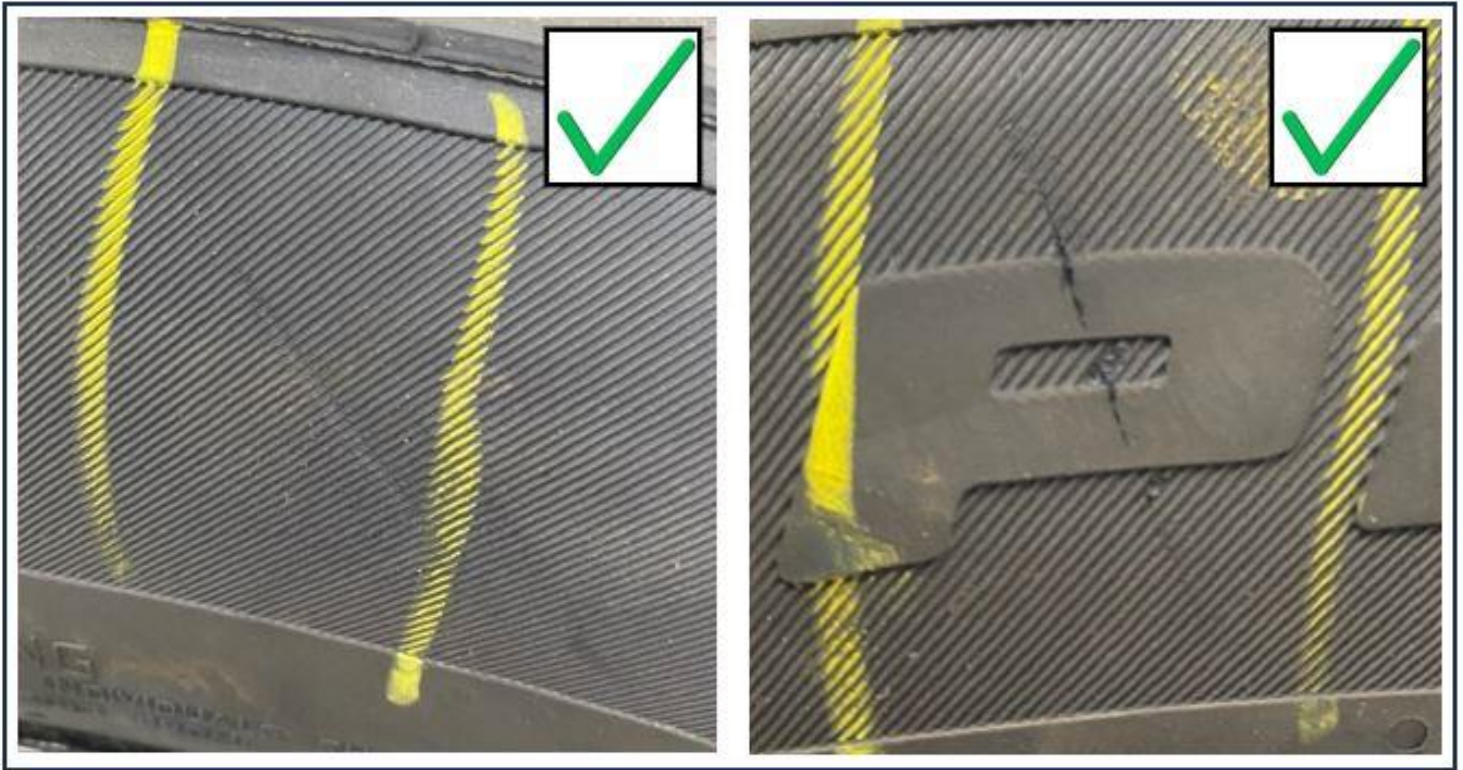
Superficial marks on sidewall with a depth of less than 1 mm (do not replace tires)
